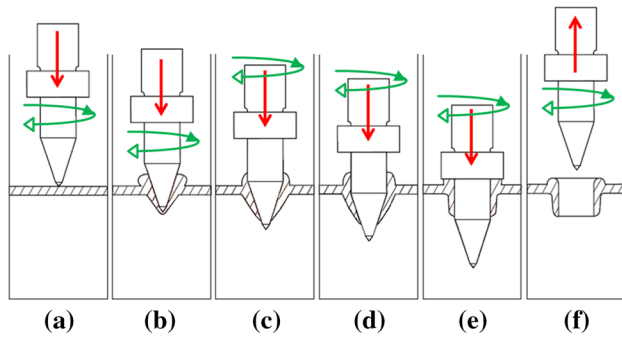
Friction drilling steps: a initial contact; b tool-tip penetration to the material; c material flow; d tool-cylindrical region penetration; e bushing forming; f tool withdrawal
